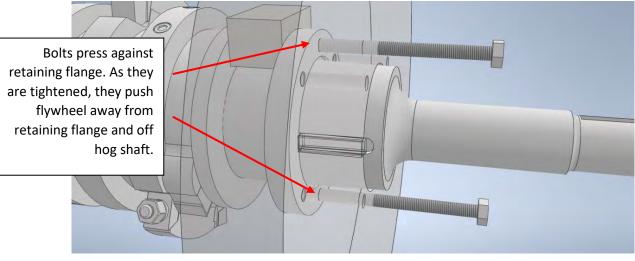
Tightening Bolts to Remove Flywheel (ER)
